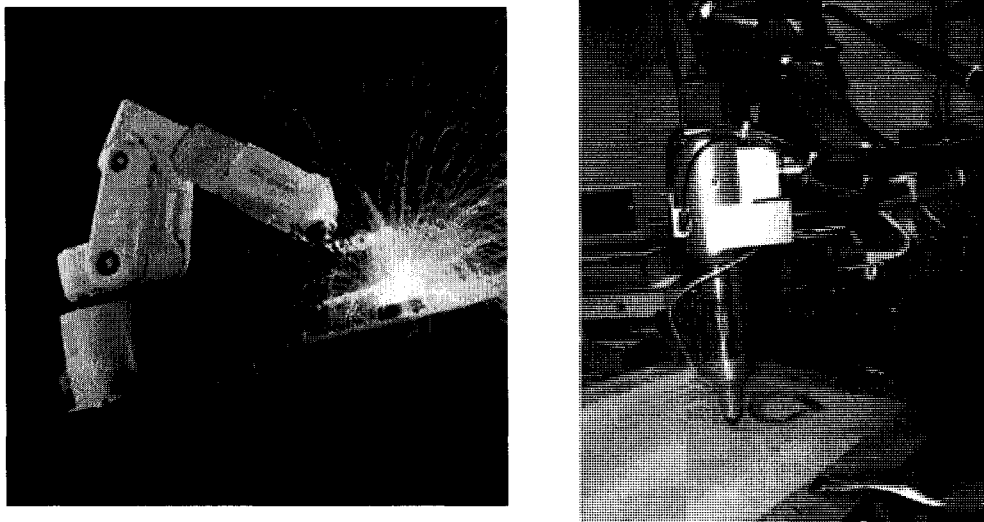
Arc welding task (left) and laser cutting task (right)
